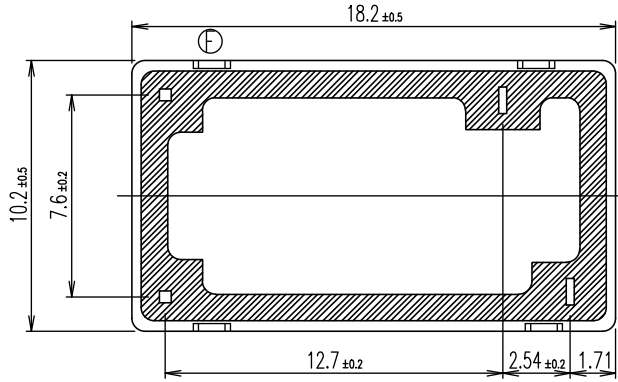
FIGURE FOR PRINTED CIRCUIT BOARD PROCESSING (BOTTOM VIEW)
